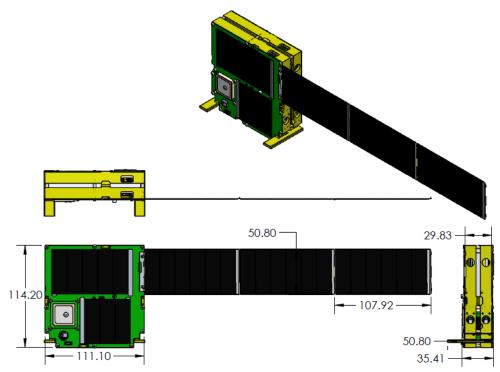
Double Frame ThinSat Unit Detail, Dimensions in mm
